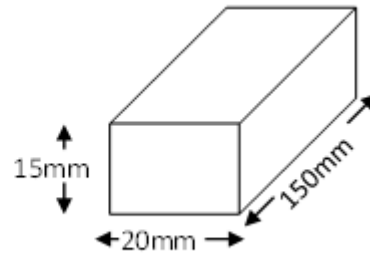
Dimension of rectangular duct at inlet and outlet
